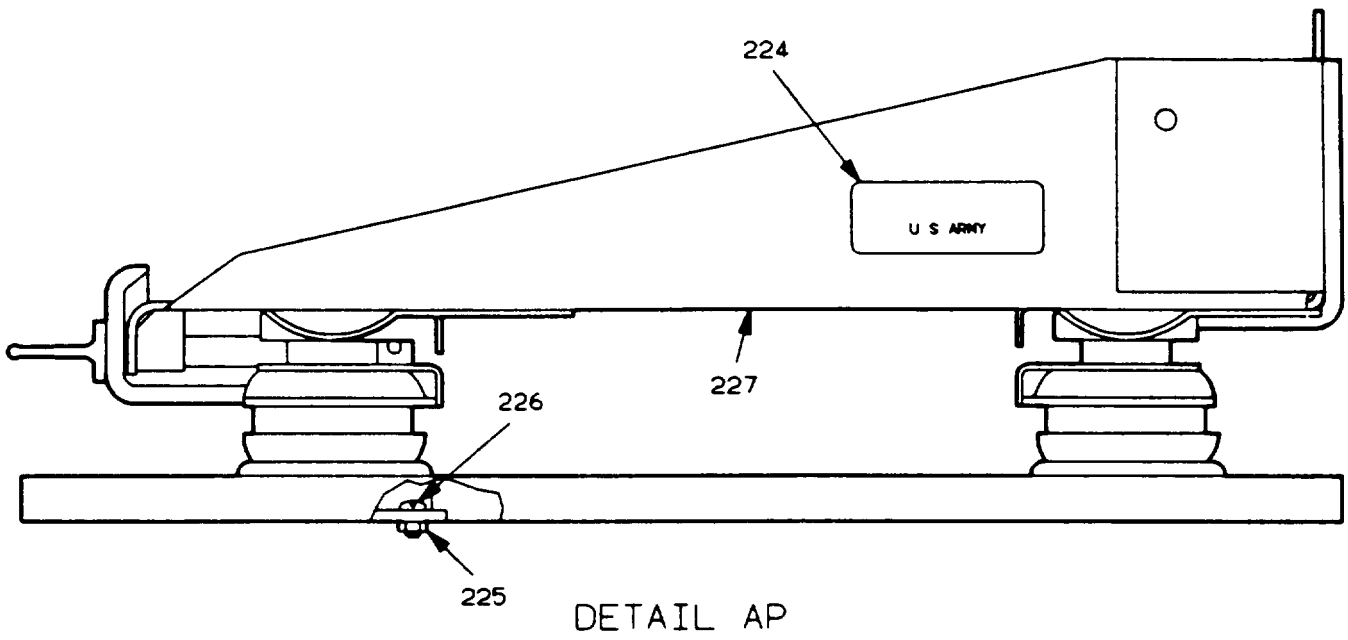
SHELTER ASSEMBLY (SHEET 18 OF 24)
